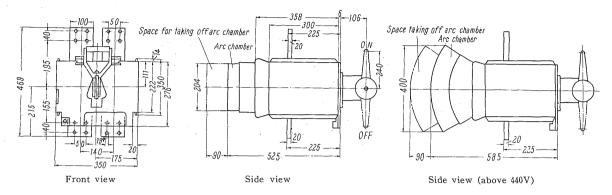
Outline drawing of air circuit breaker, type RF 914-3000
